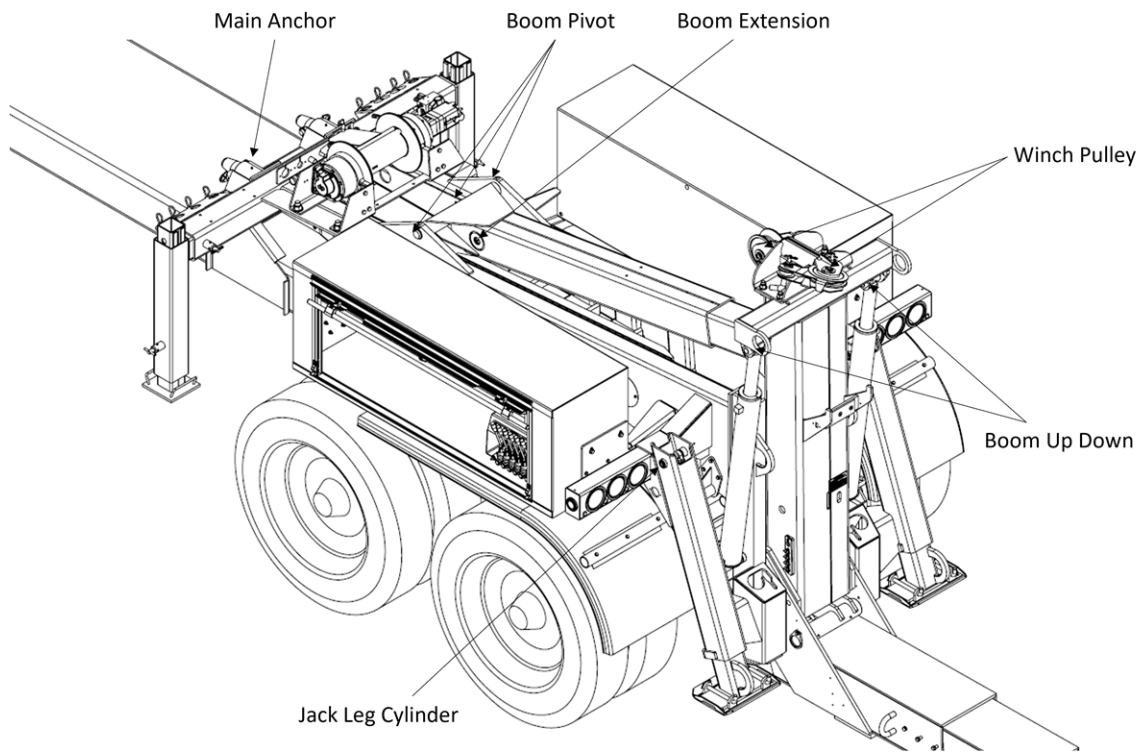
BOOM AND WINCH LUBRICATION POINTS
